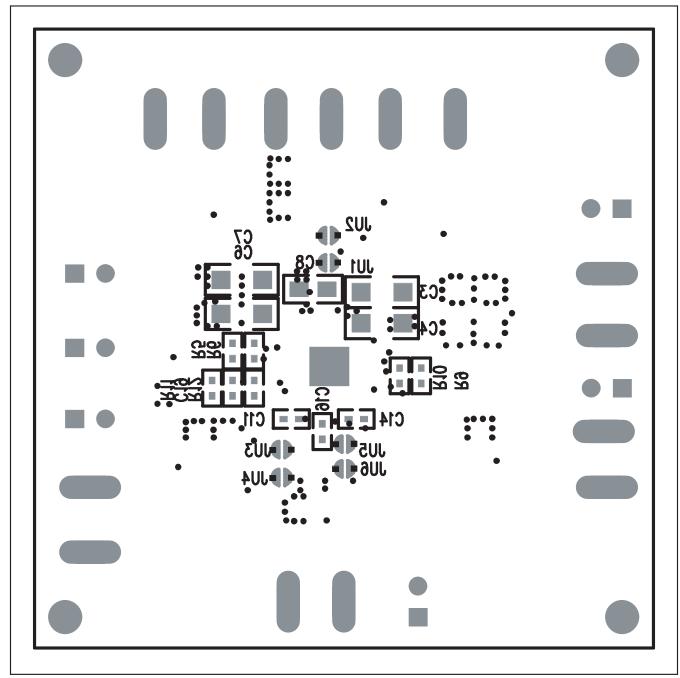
MAX8858 EV Kit PCB Layout—Bottom Layer
